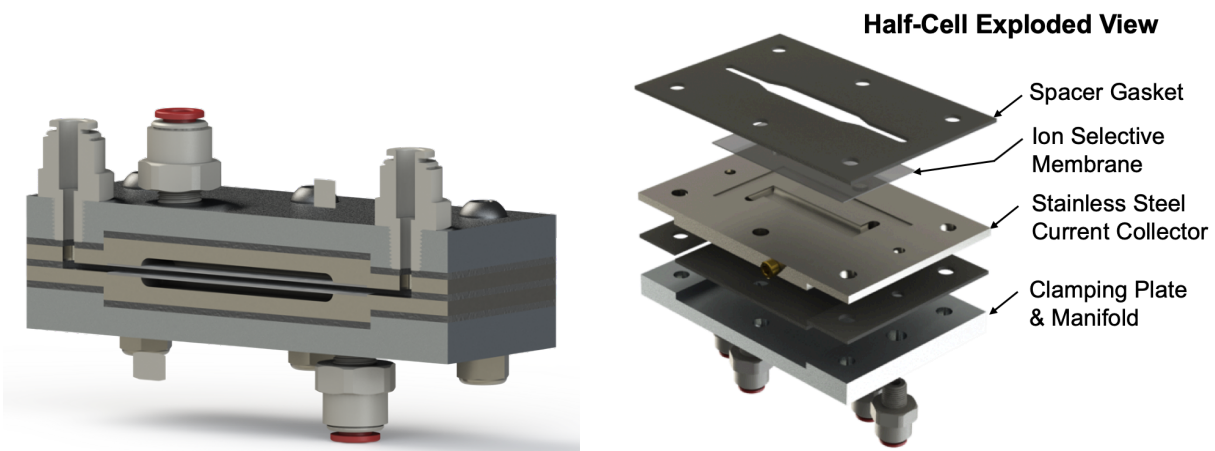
Version 1 prototype FCDI cell shown in cross-section (left), and exploded view showing flow-electrode channel and integrated membrane (right).
